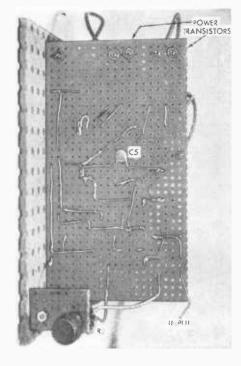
shows the assembled amplifier and power supply. The fuse shown in this figure is not essential. Mount the output transformer (L2) and the power transformer (L3). Only the 0, 12, and 48 ohm primary leads of L2 will be used. Cut off the ends of the other primary leads and bend them out of the way. The secondary leads to be used will depend on the impedance of the speaker you'll be using. There are 4, 8, and 16 ohm secondary taps.
